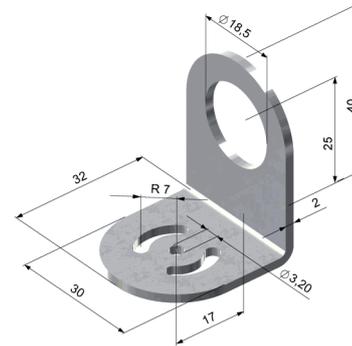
Mounting bracket for massive housing, adjustable in one axis [TM-FBMH-CT]
